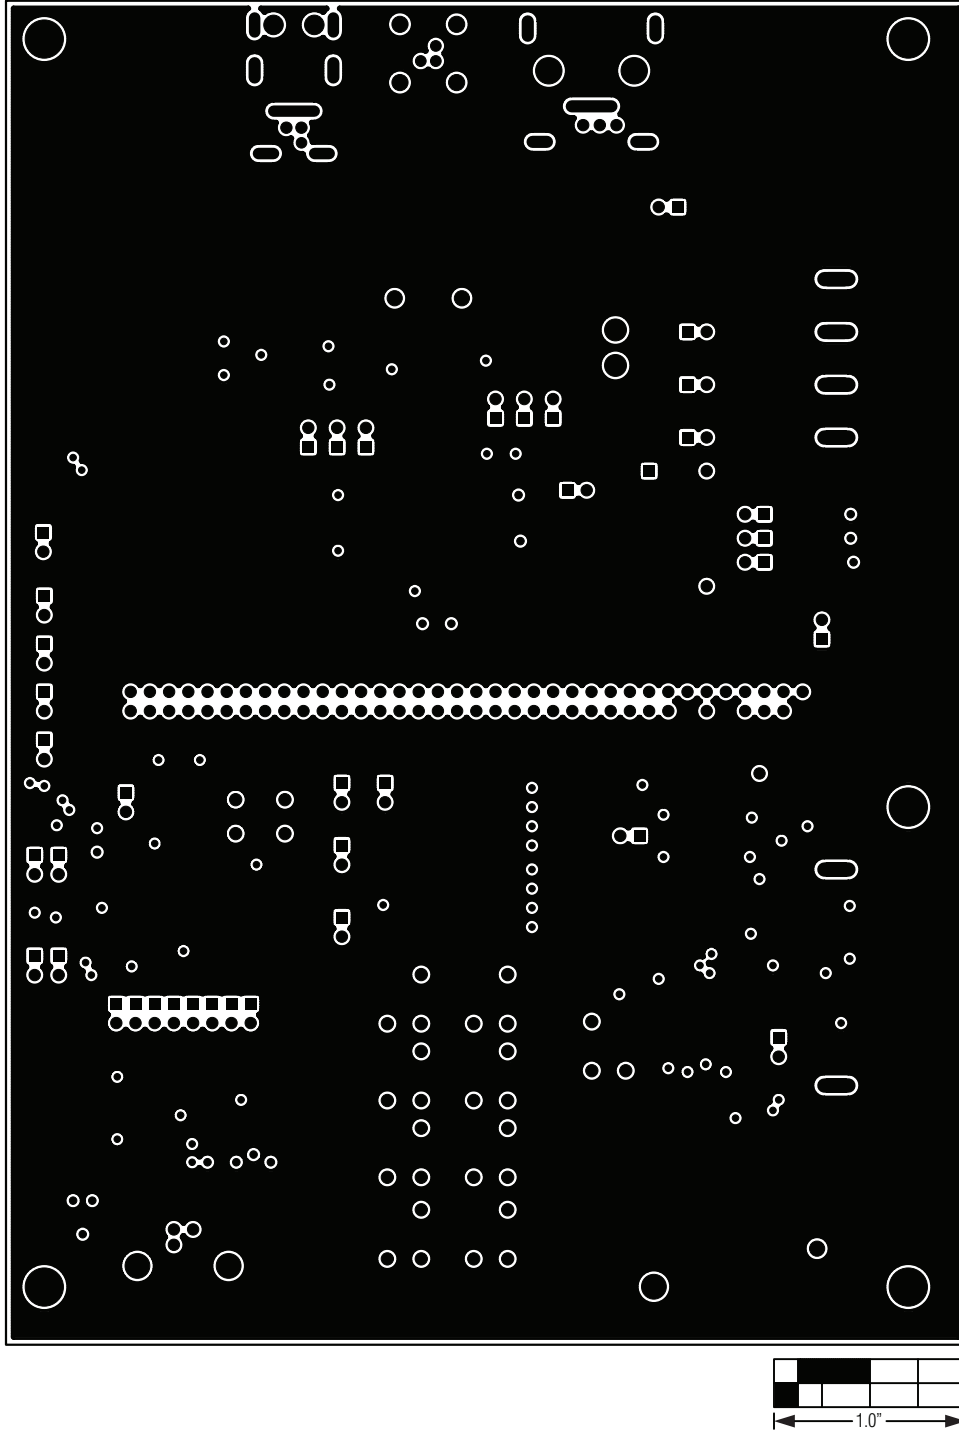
MAX9259 EV Kit PCB Layout—Ground Layer 2
